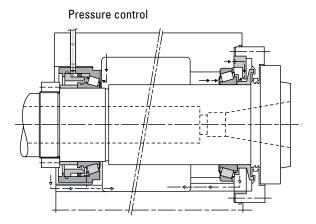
Simple mounting with a Hydra-Rib bearing cooled by an axial oil inlet and a TSMA bearing with oil jets at both ends of the rollers for inlet and cooling.
